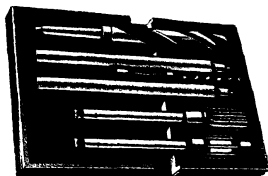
PROTECTING BOARD FOR SENSITIVE TOOLS
